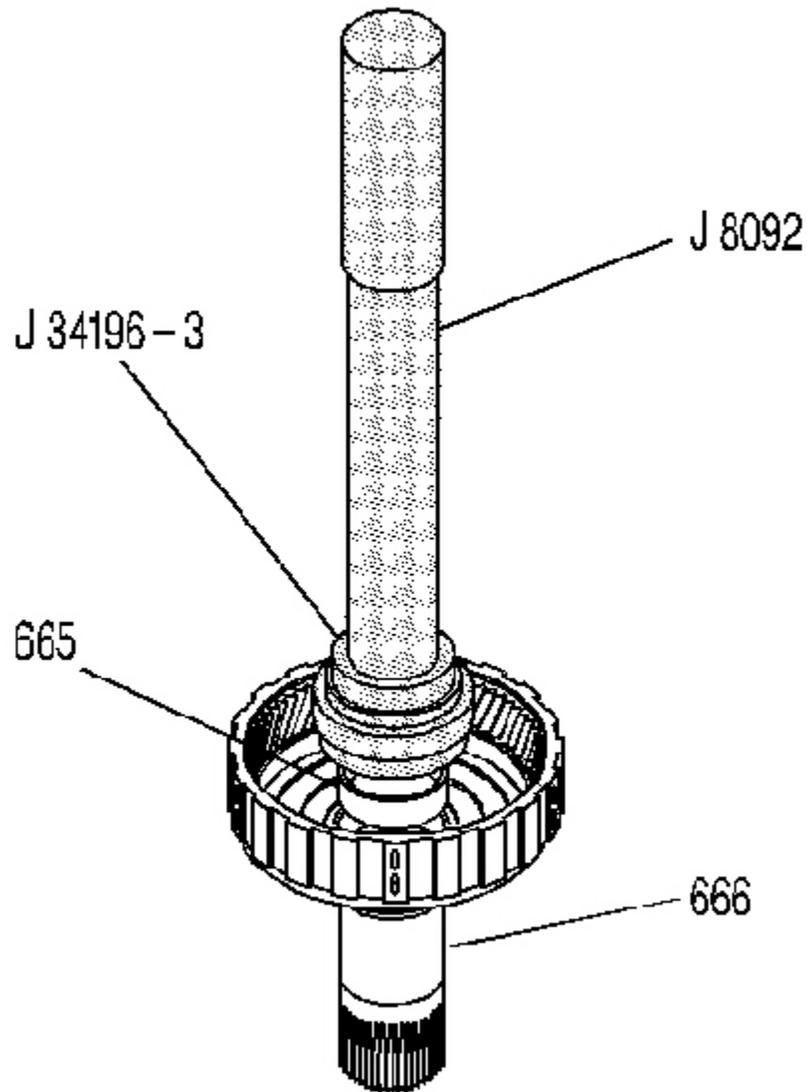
Installing New Reaction Carrier Shaft Front Bushing Using J 34196-3 & J 8092
